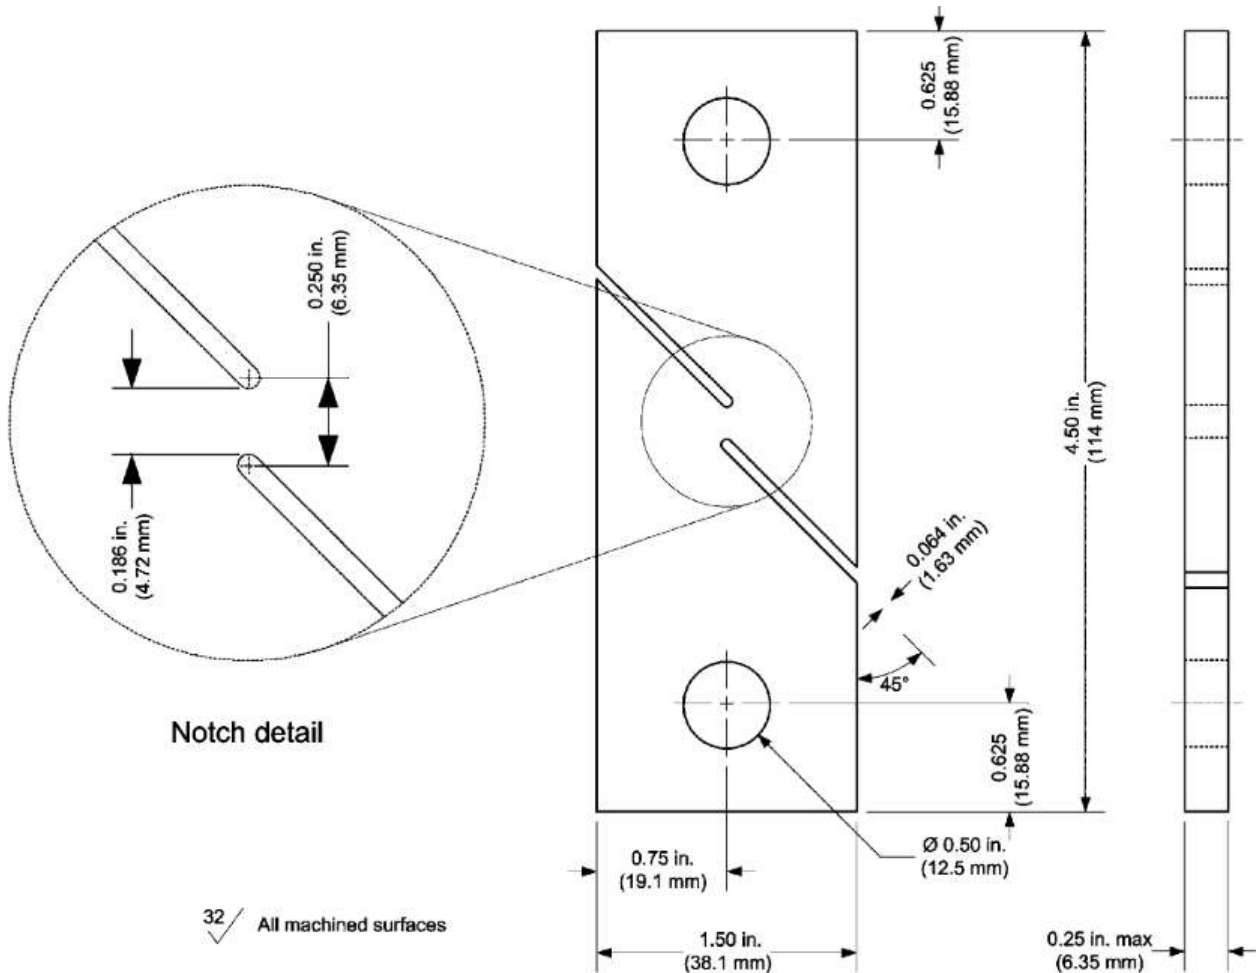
Specimen Design in ASTM B831-05, Standard Test Method for Shear Testing of Aluminium Alloys.
